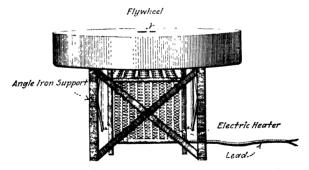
Flywheel and heater ready for oven to be lowered over them.
